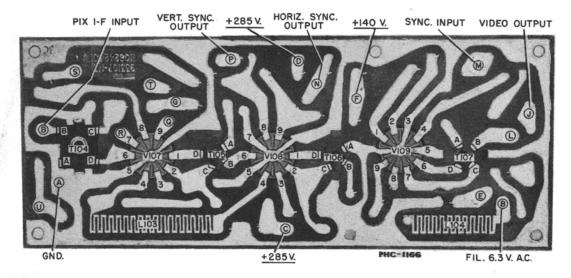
Picture I-F Printed Circuit Board-Wiring Side
